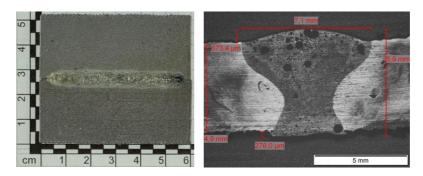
Welding of as build 45° – as build 45°: surface of weld & cross section
